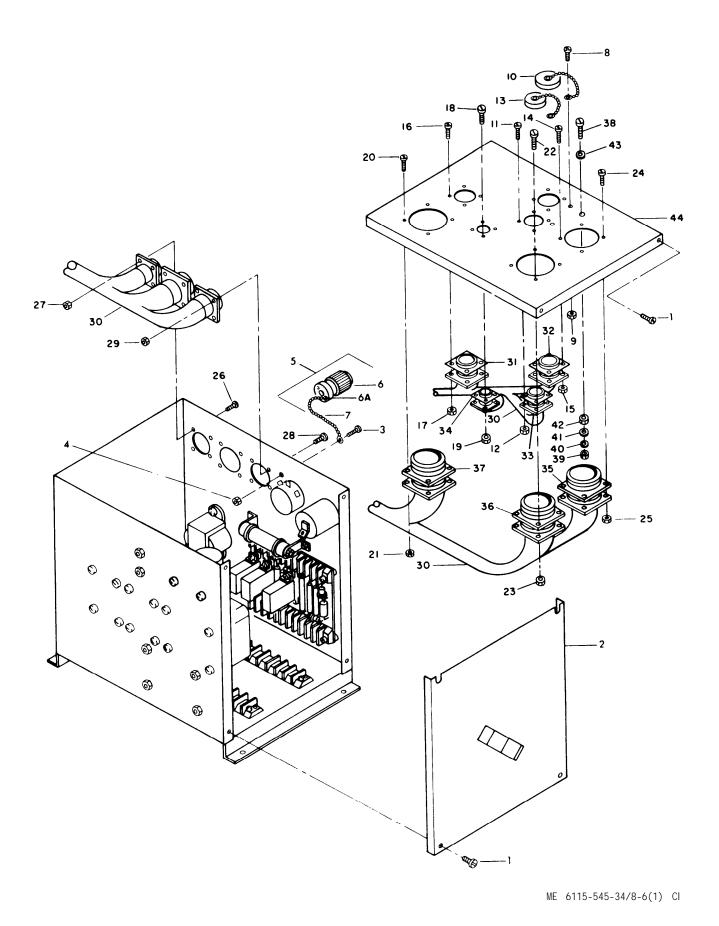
Special Relay Box Assembly (Sheet 1 of 2)
